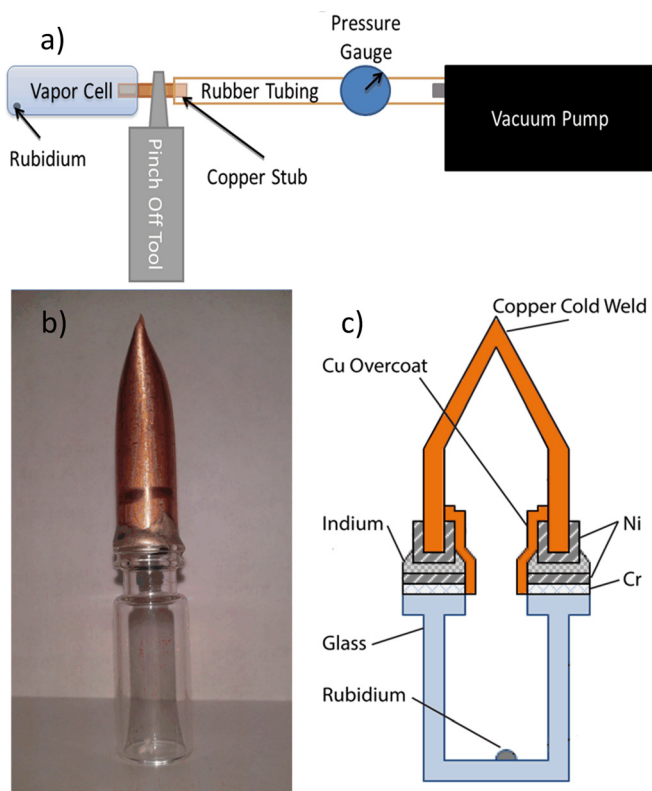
(Color online) (a) Cold-weld sealing with copper crimping and vacuum setup. (b) Photograph and (c) cutaway illustration of a minicell with copper plated indium solder seal.
